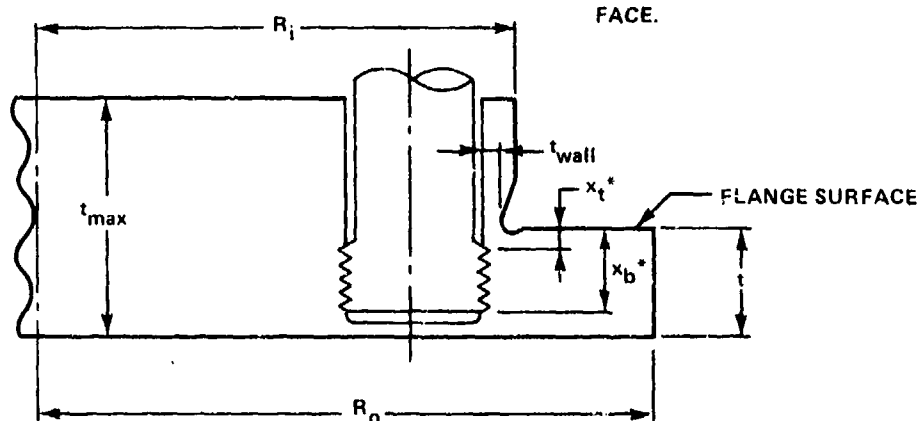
Dimensions Used in Table 2 for Crank Ring
